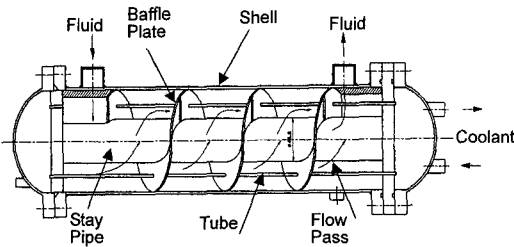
Shell-and-tube heat exchanger with spiral baffle plates
